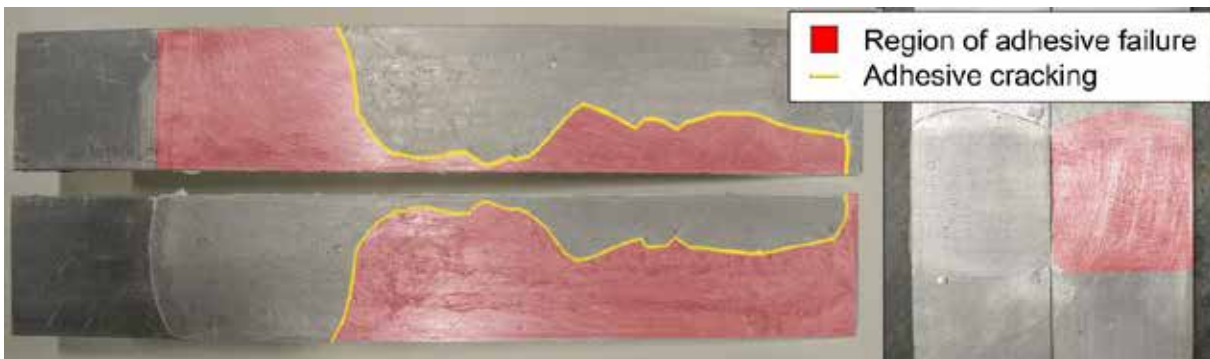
Example of failure mechanisms observed. Left: DCB specimen showing adhesive failure and cracking of the adhesive layer. Right: Lap-shear specimen showing only adhesive failure.
